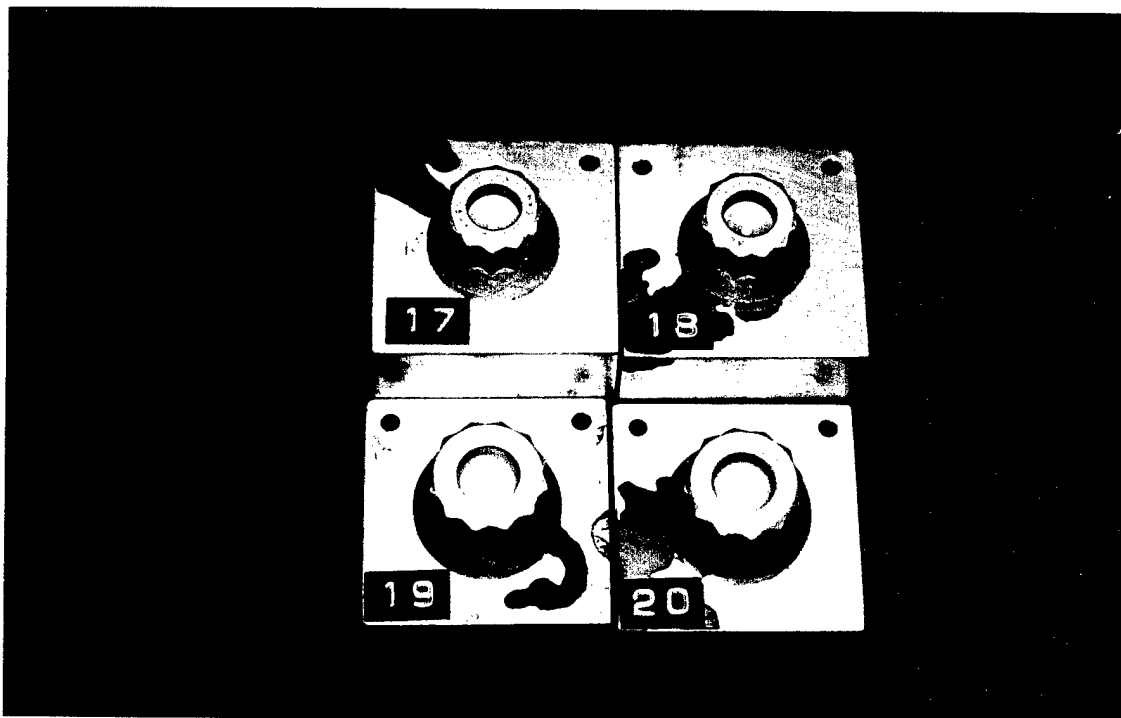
H11 Chromium Hot Work Tool Steel Bolt Heads With IVD Al Coating Before Salt Spray Exposure. Reduced 25%.
